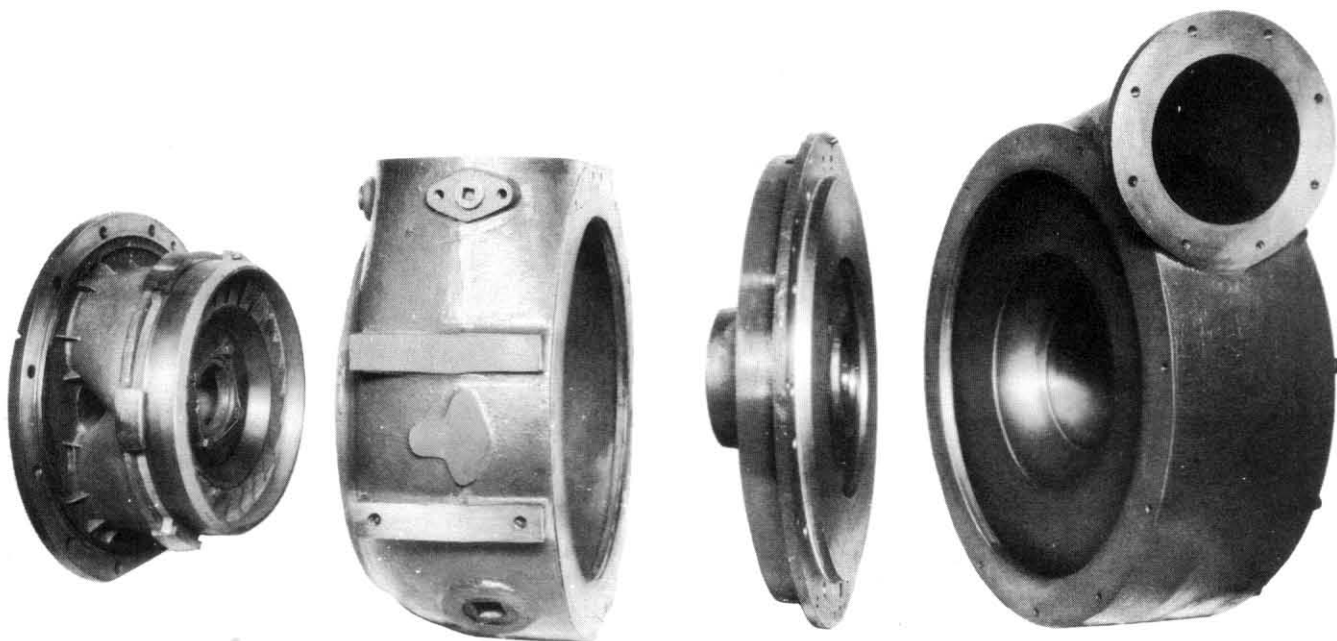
Left to right: Inlet Casing Assembly, Turbine Casing, Intermediate Casing, Blower Casing Assembly.
